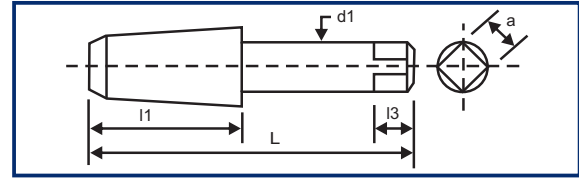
Upto 1/4" BSCy size, taps will be supplied with male centers on both sides.
